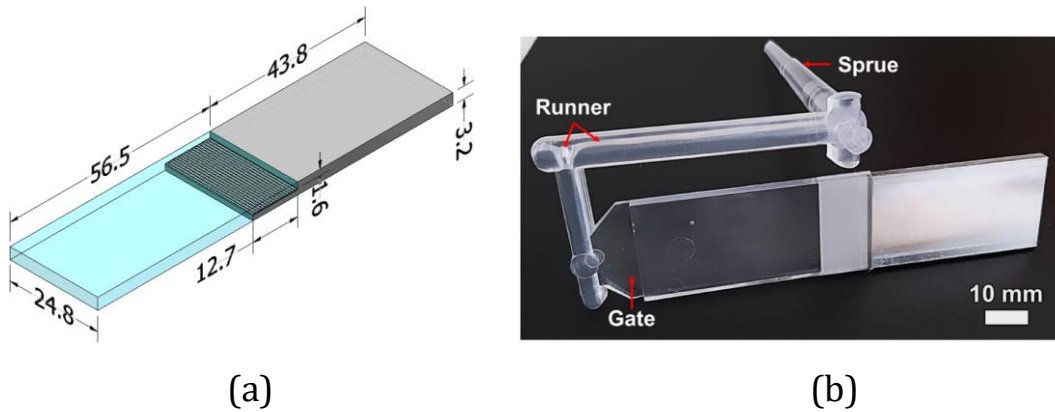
(a) Geometry and dimensions (in mm) of the injection overmolded PC/AA6061 hybrid joint specimen. AA6061 in light gray, (b), photograph of an injection overmolded PC/AA6061 joint specimen containing the sprue, runner and gate.
